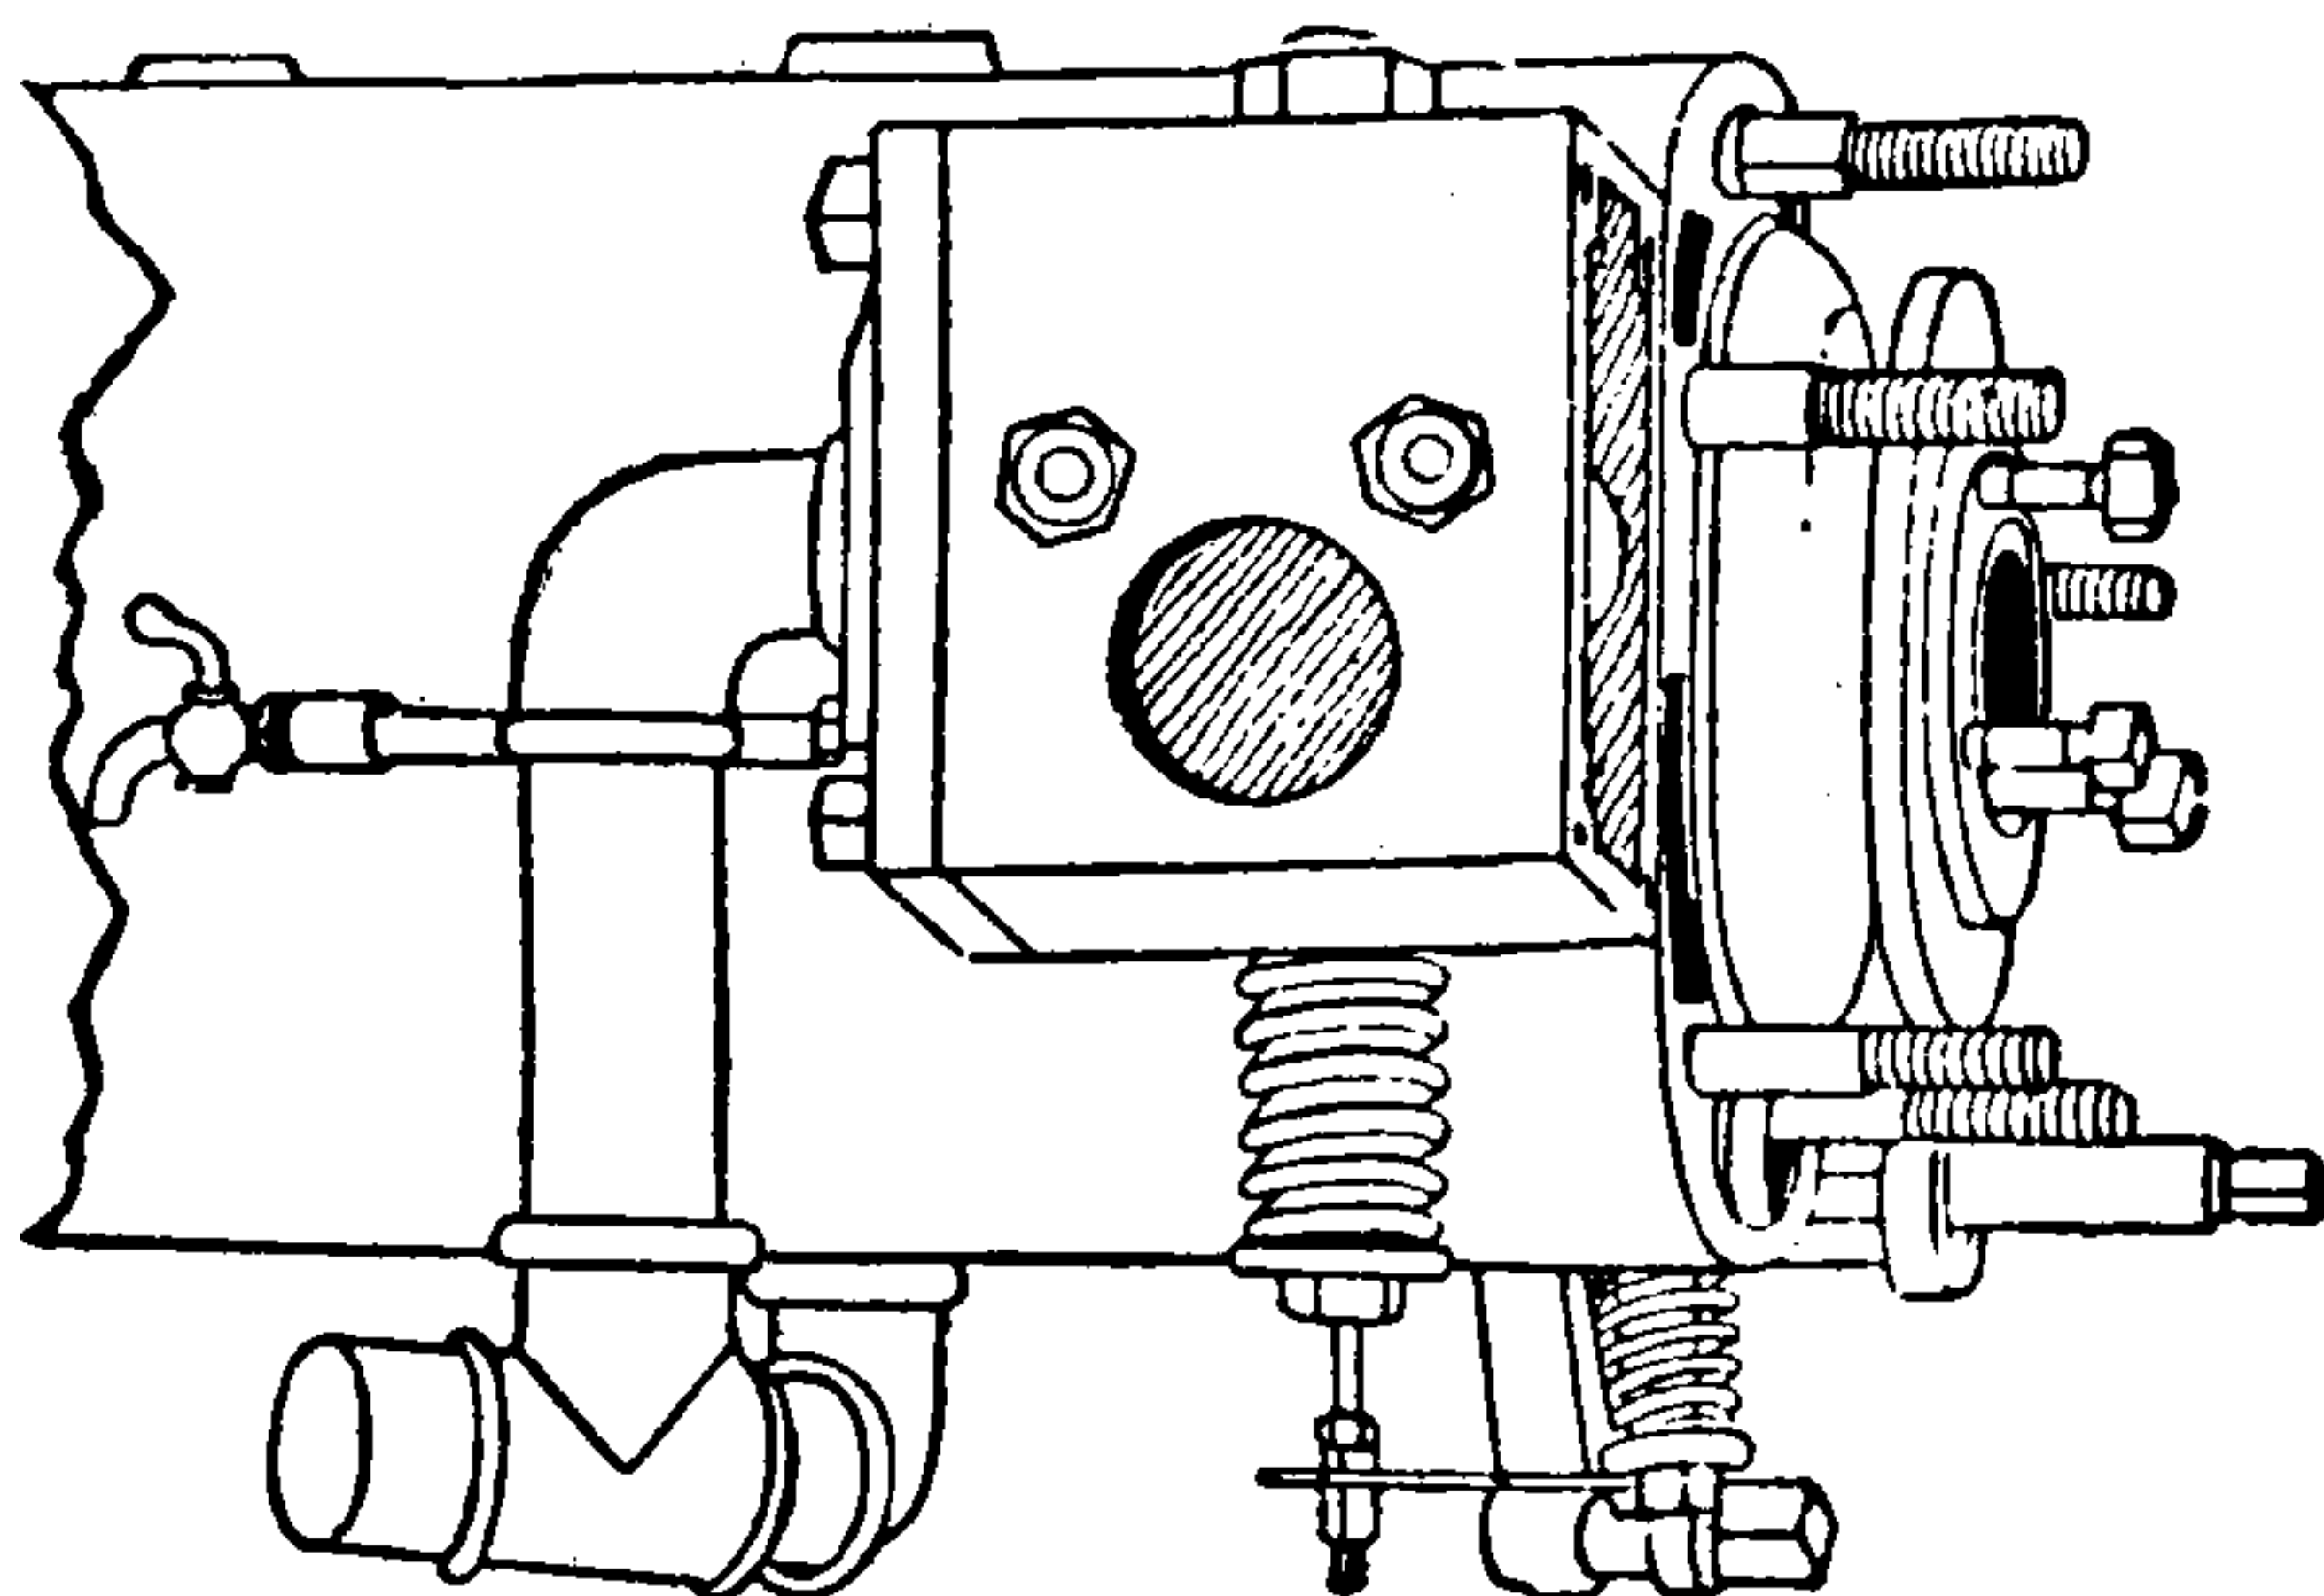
EXHAUST VALVE BOX, WATER HEAD OFF.
